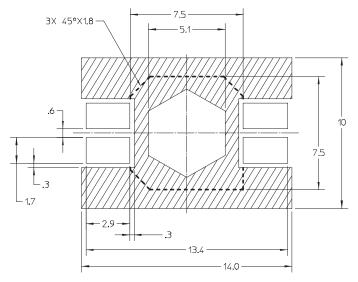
4-Lead Gullwing Package Solder Pad Layout.
